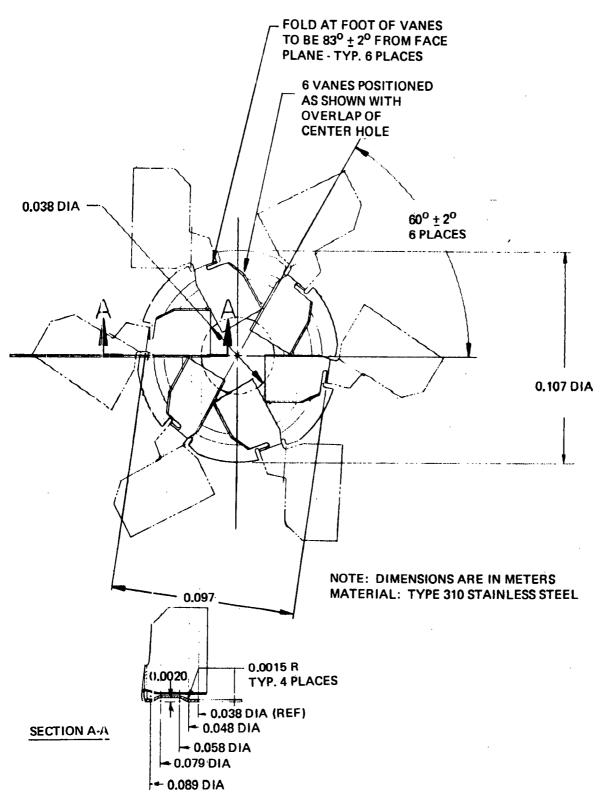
Second prototype optimum burner head design with a modified choke plate configuration
